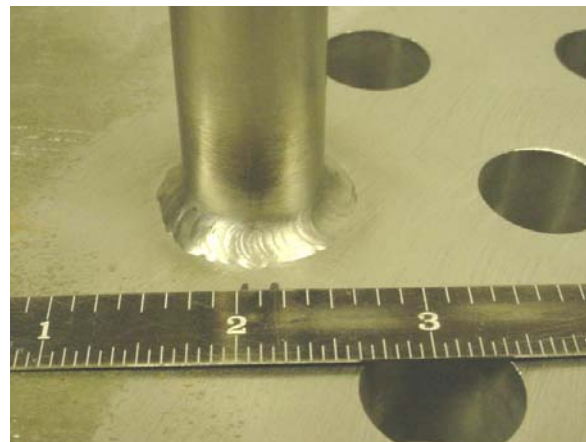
EWI Consumable Insert Weld Profile
